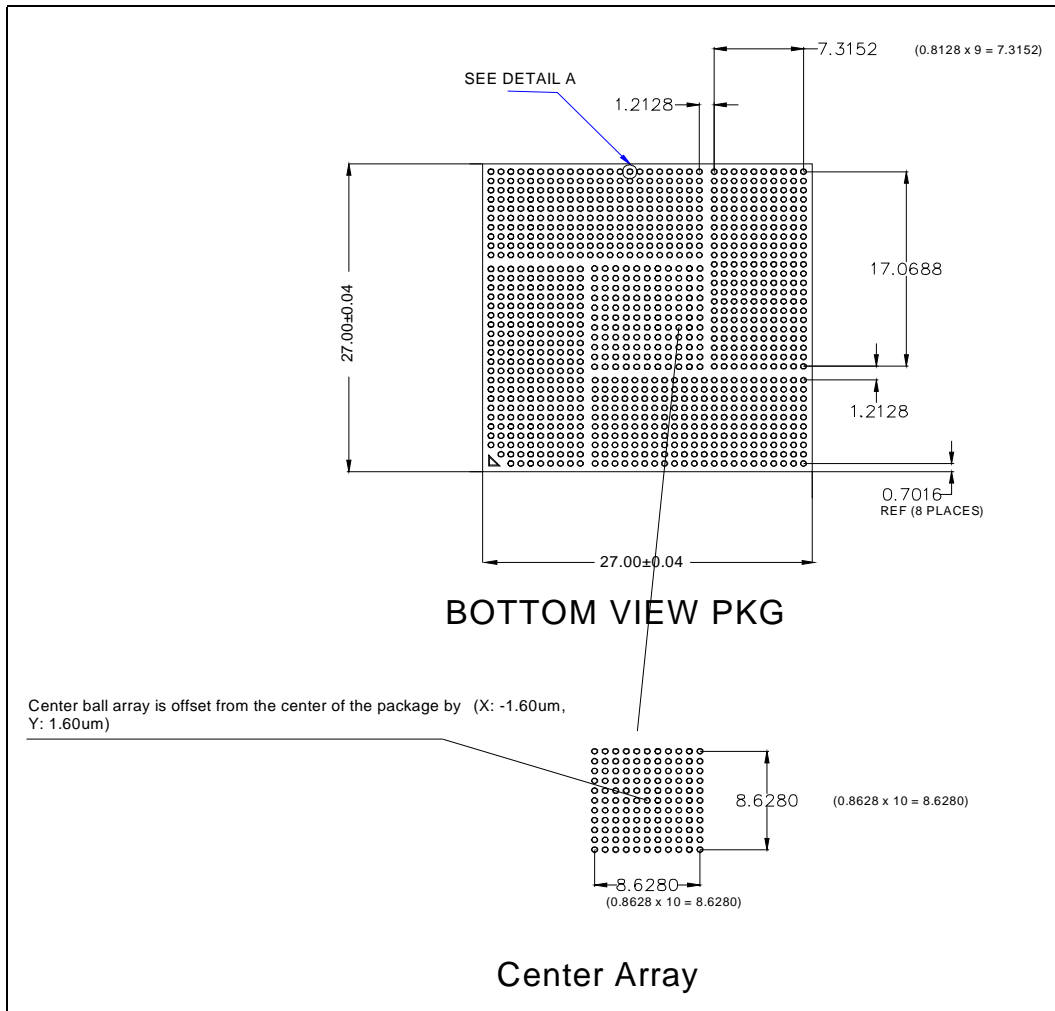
Mobile Intel 945GMS/GSE Express Chipset Package FCBGA (Bottom View)
